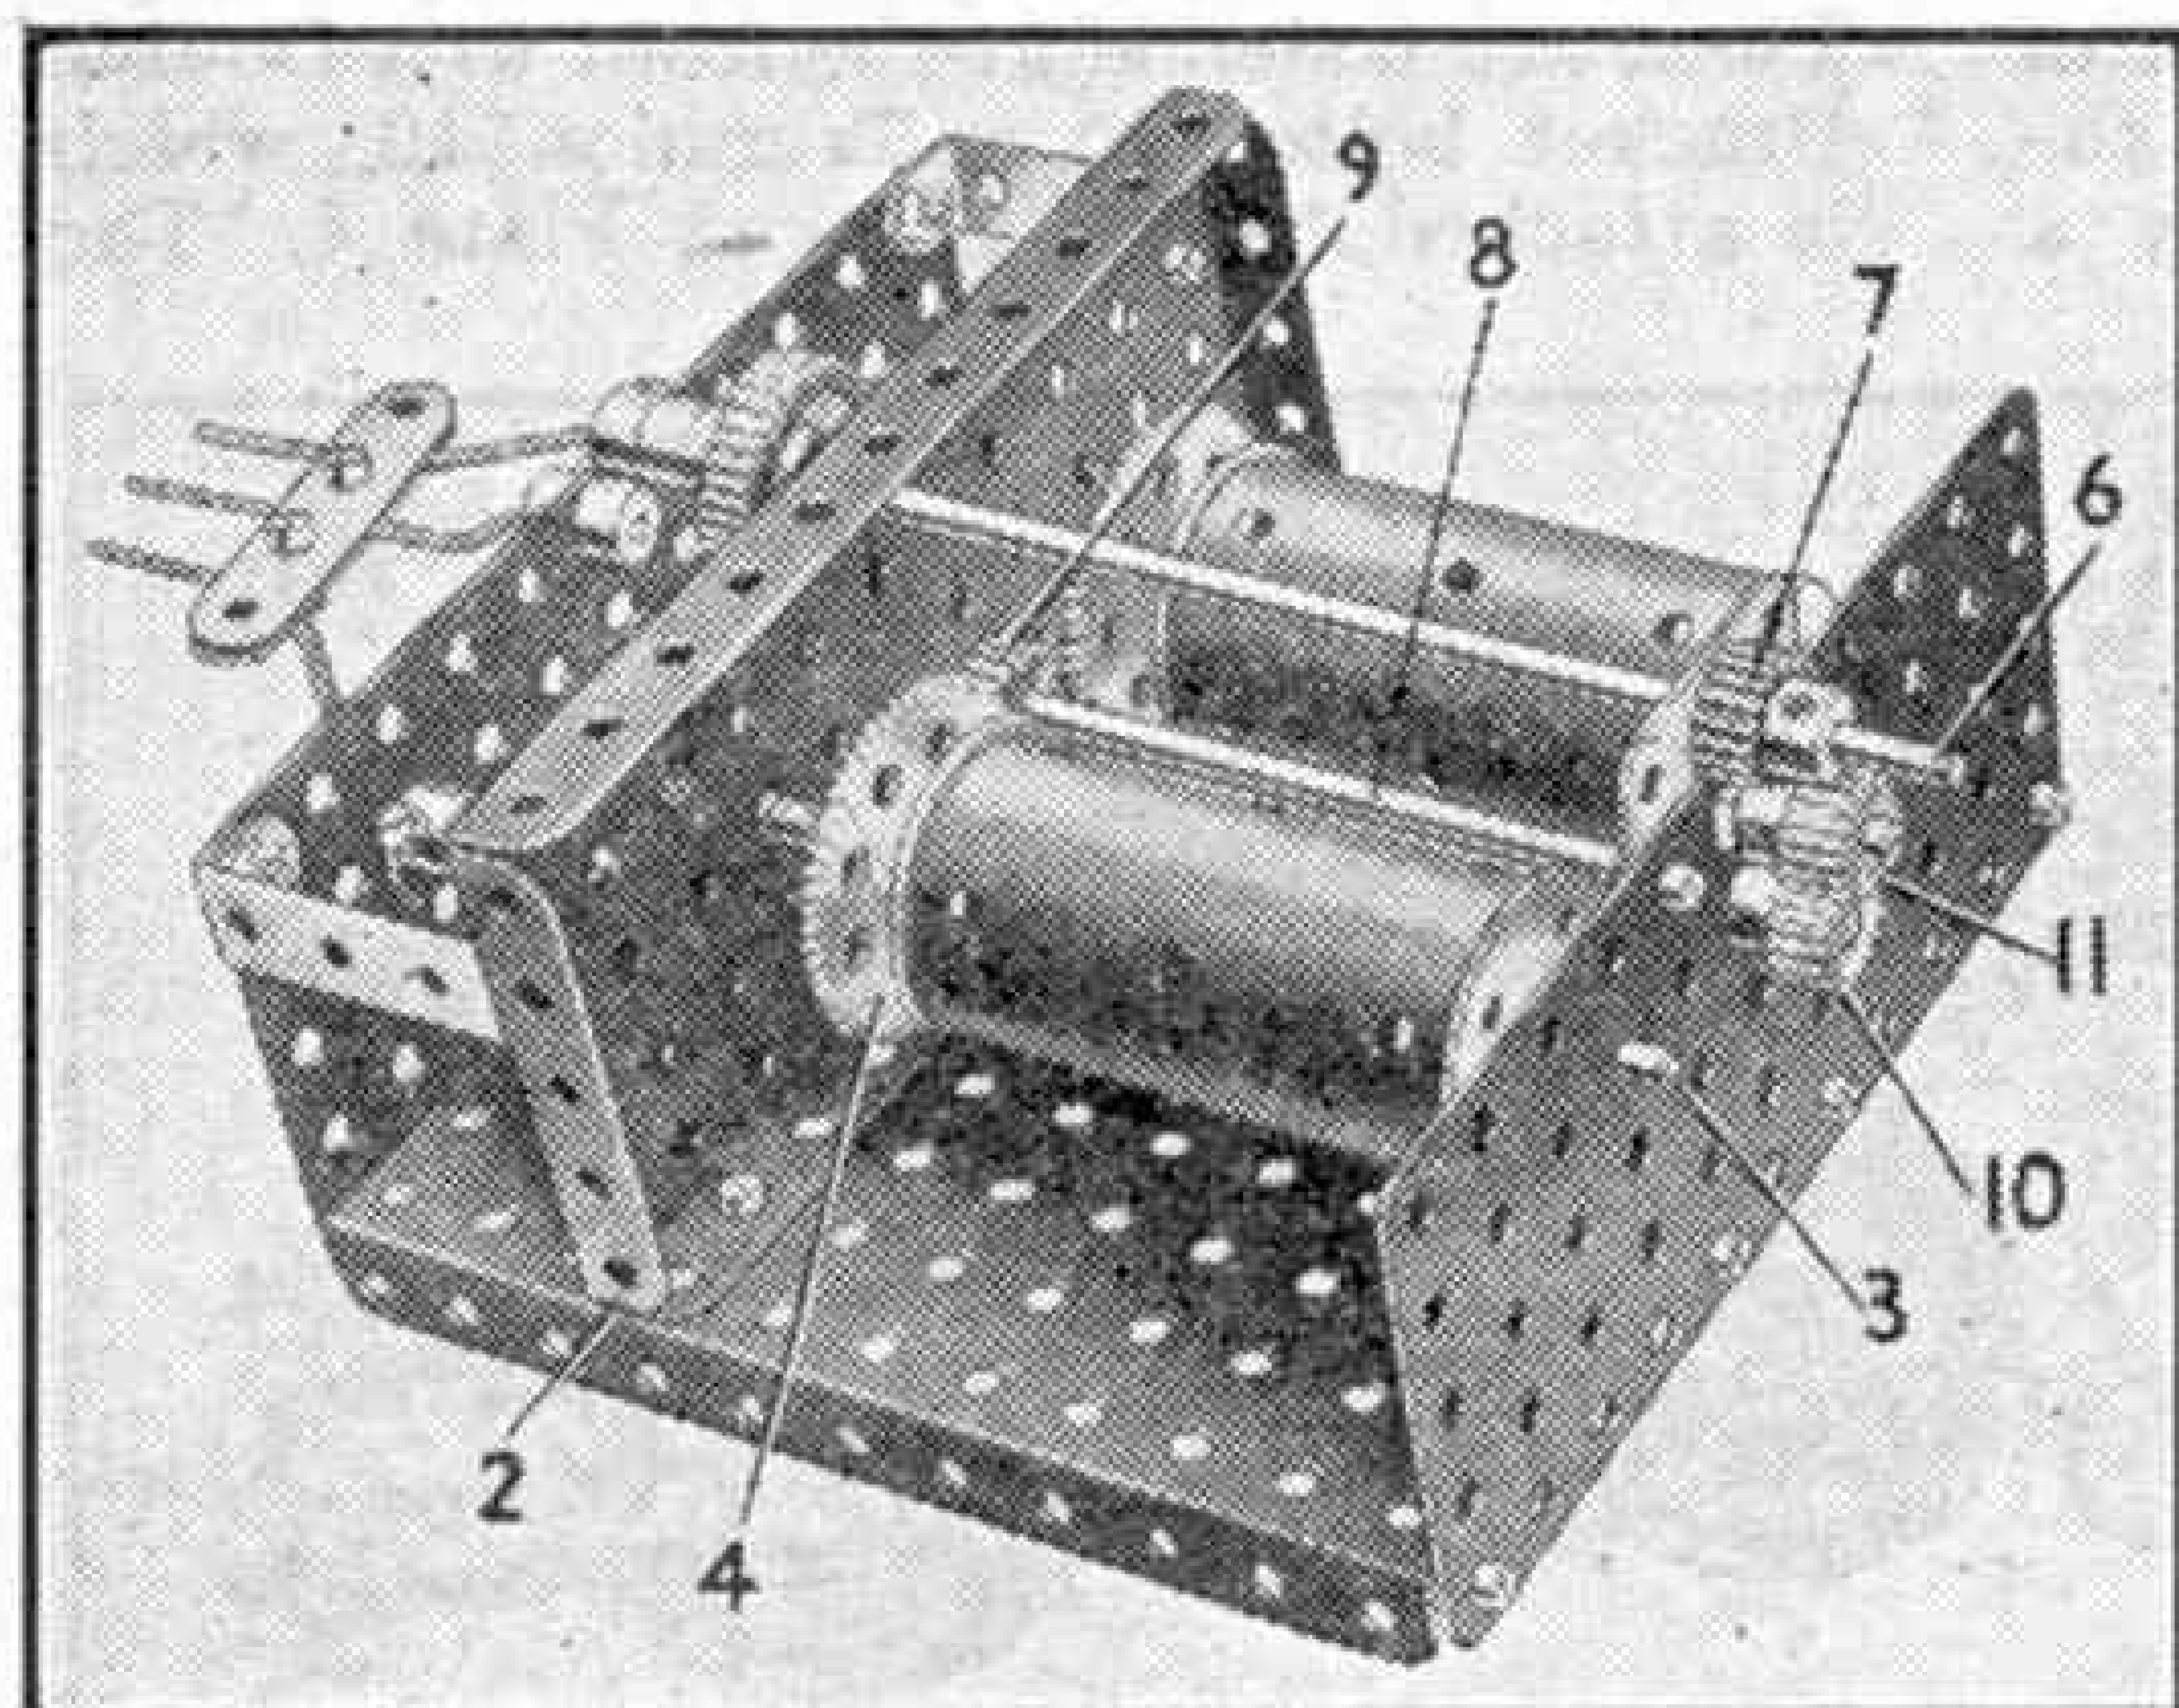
The crane winding mechanism showing how the control cables are attached.
